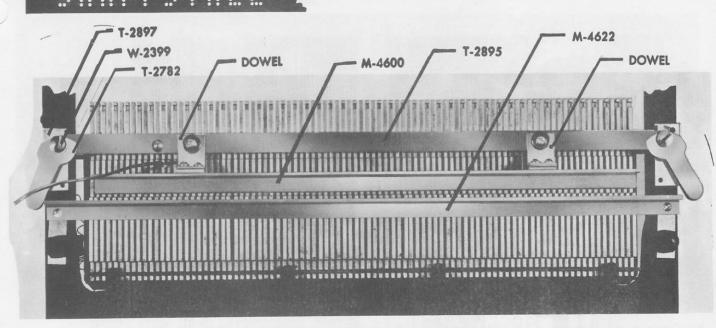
M-4600 Keyboard Bar and M-4600 Weight Holding Tool.
